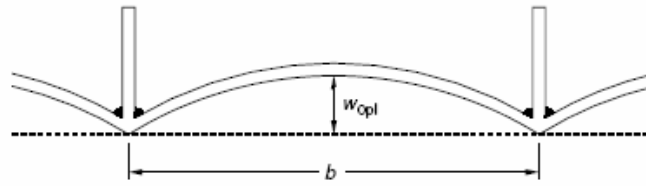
Typical initial deflection patterns in steel plating between stiffeners
